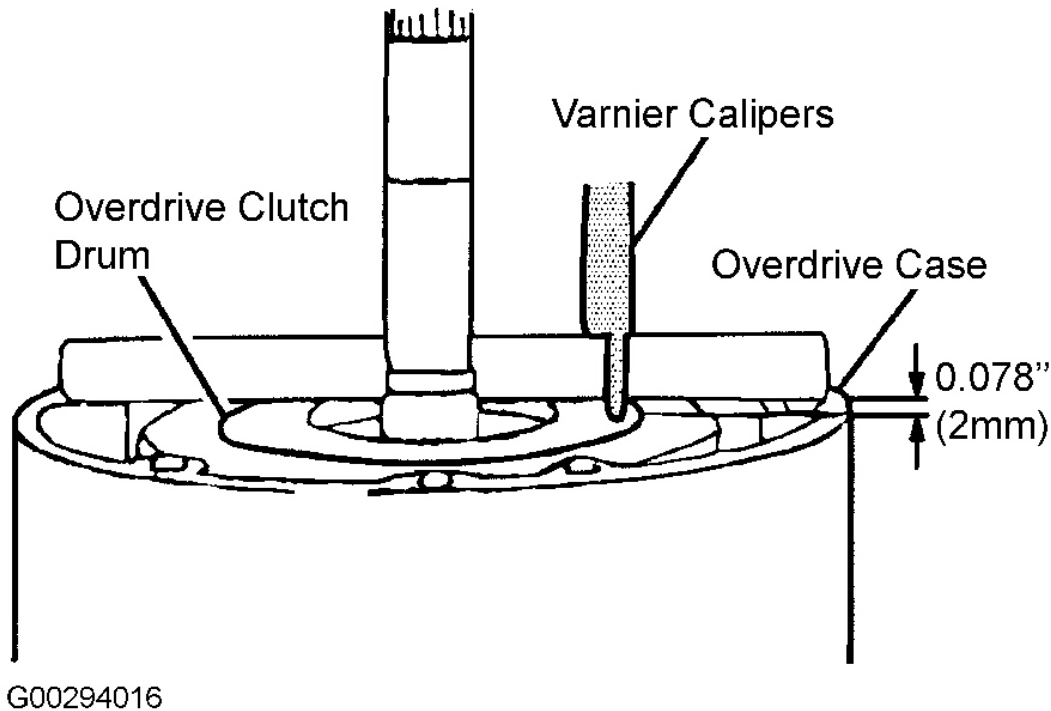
Measuring Overdrive Case-To-Clutch Drum Height Difference
